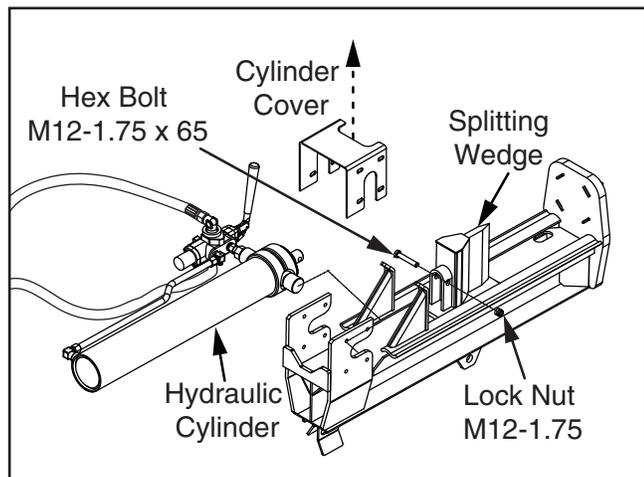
Attaching hydraulic cylinder to splitting wedge.
